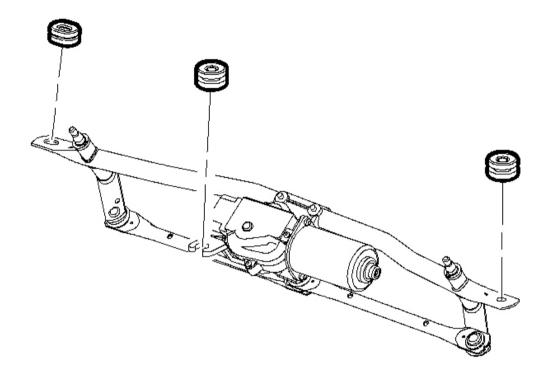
Removing/Installing Front Wiper Motor Courtesy of GENERAL MOTORS CORP.
